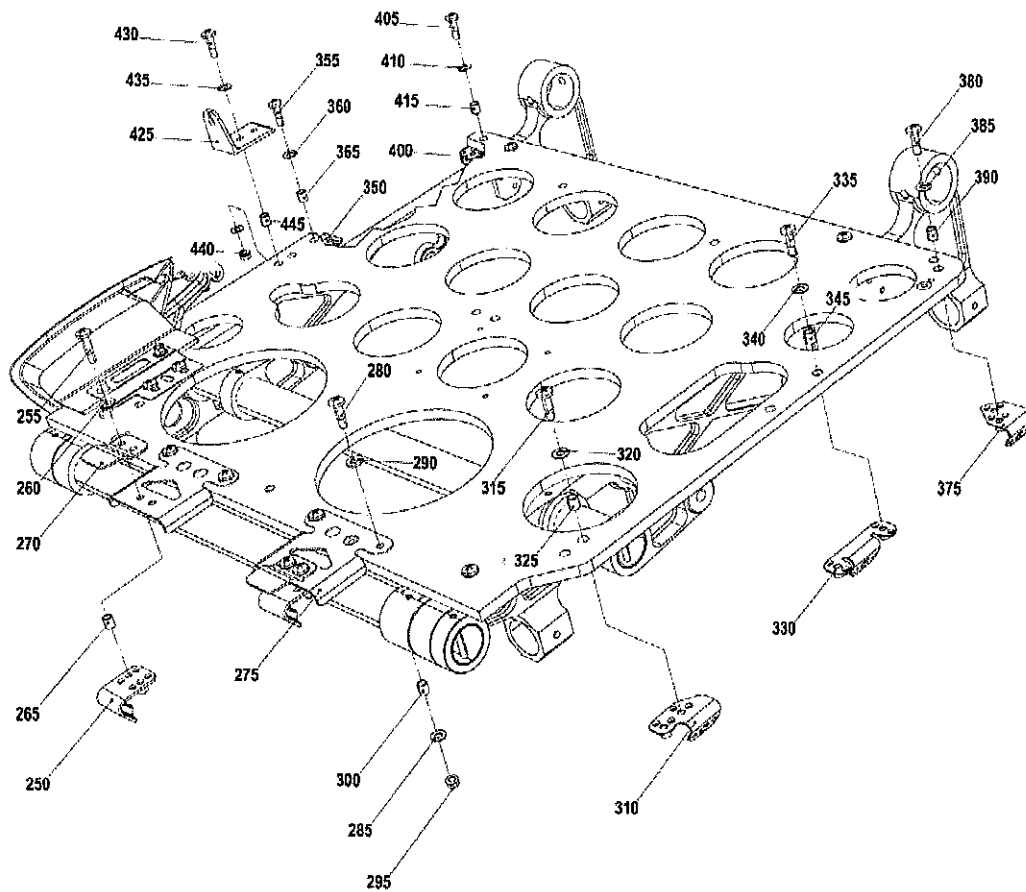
SHEET 3 SEAT PAN STRUCTURE ASSEMBLY
